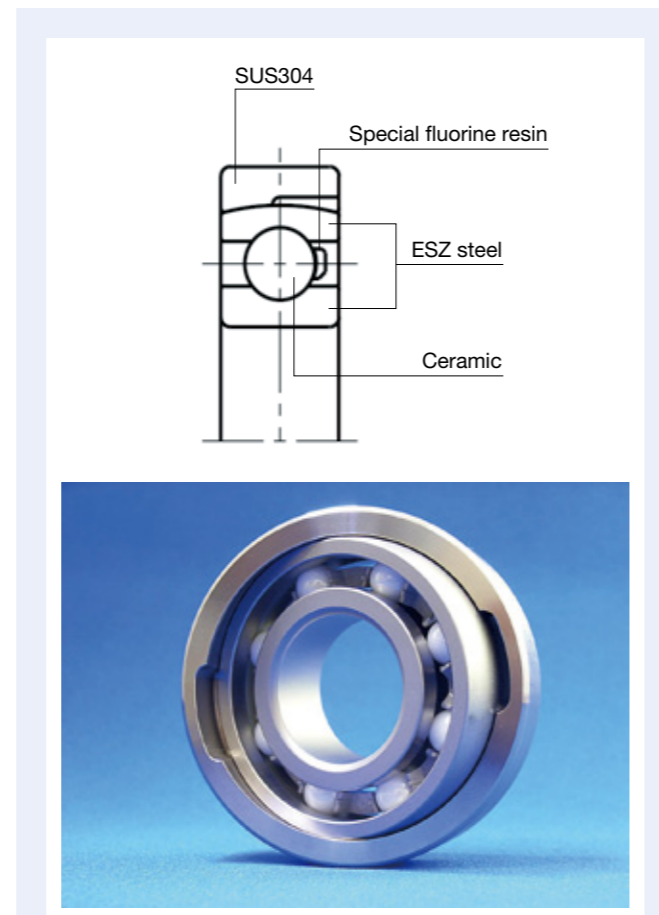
ESZ bearing made of highly corrosion-resistant, high-hardness stainless steel (aligning-ring type)
